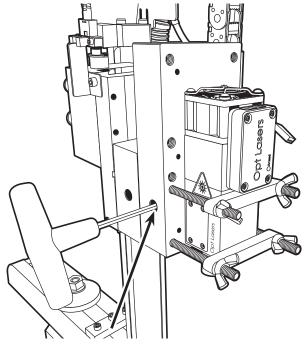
The arrow points to the access hole for the laser mount set screw.
